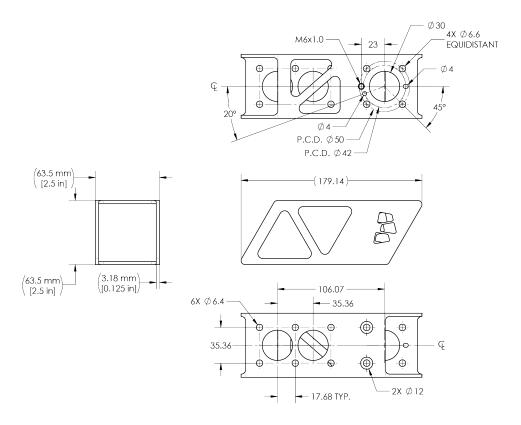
Technical Dimensions of the 100 mm Hollow Offset Link
